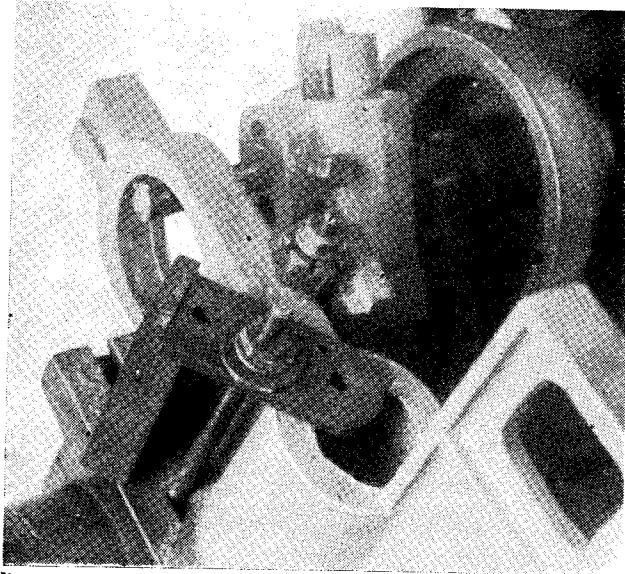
Finished tool in use. Boring and chambering 3 in. diameter hole in cast-iron bracket
